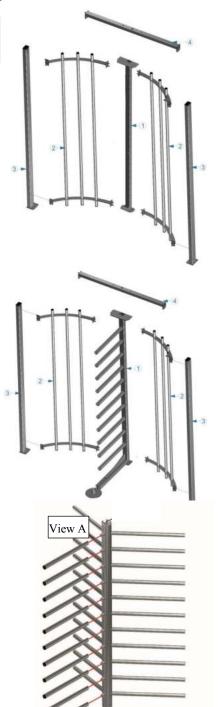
Assembly of the turnstile major components and installation of barrier rods
